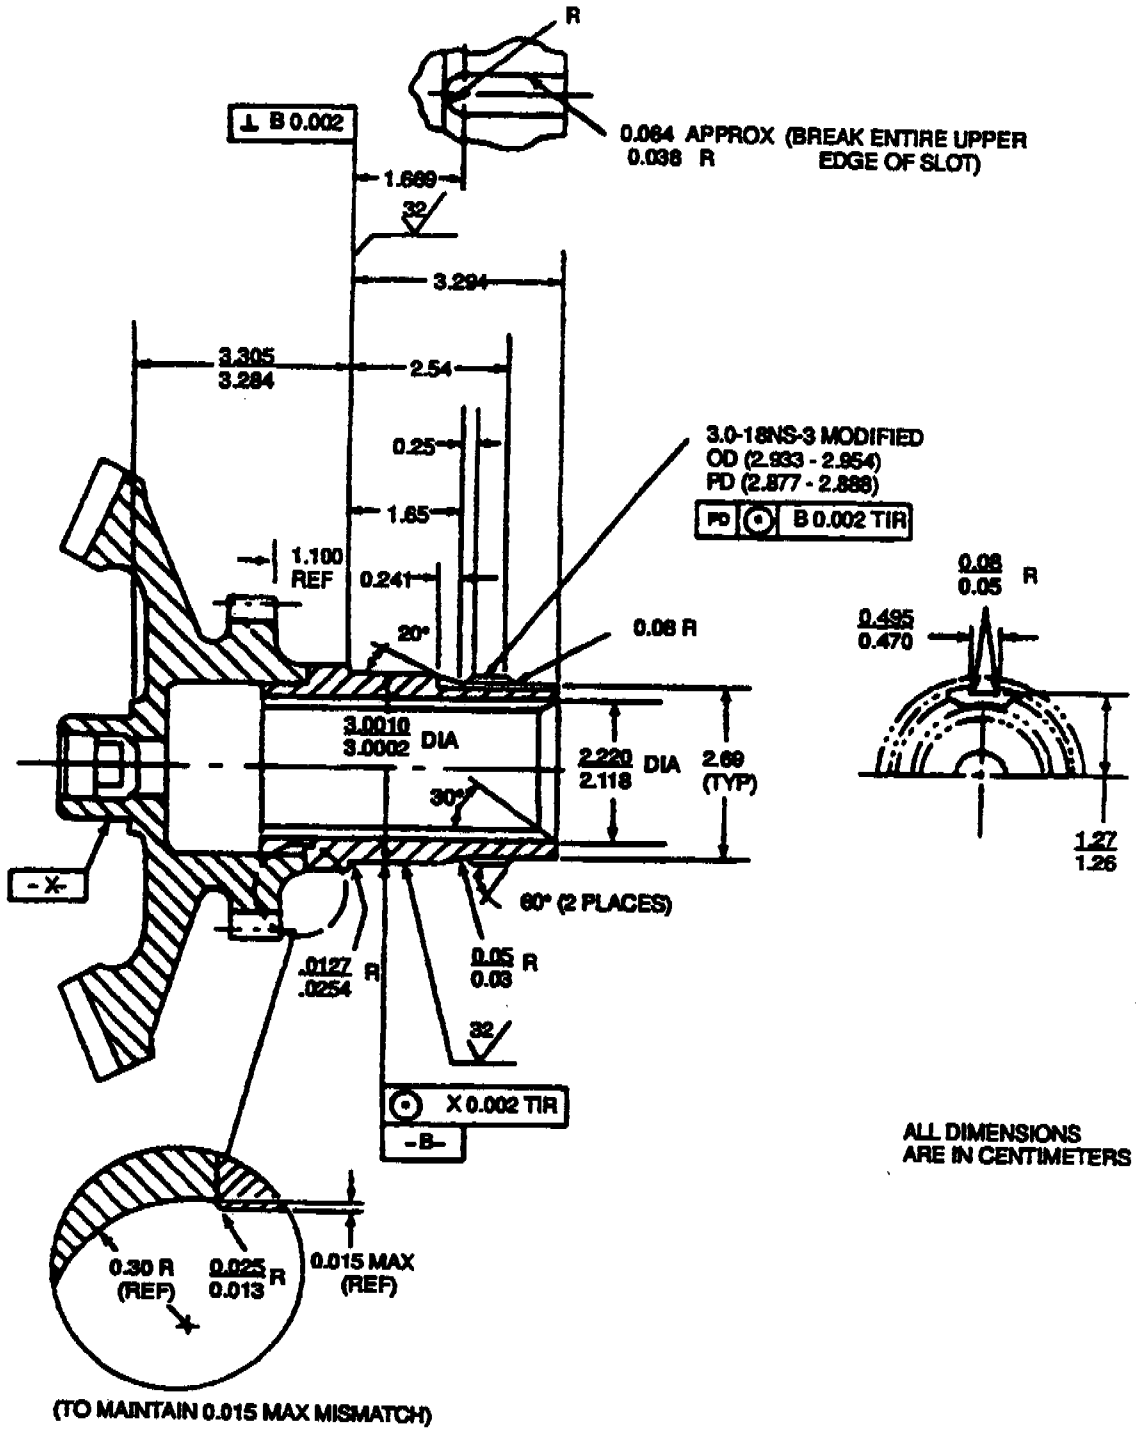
Assembly and Finish Machine of Gear (Metric).
